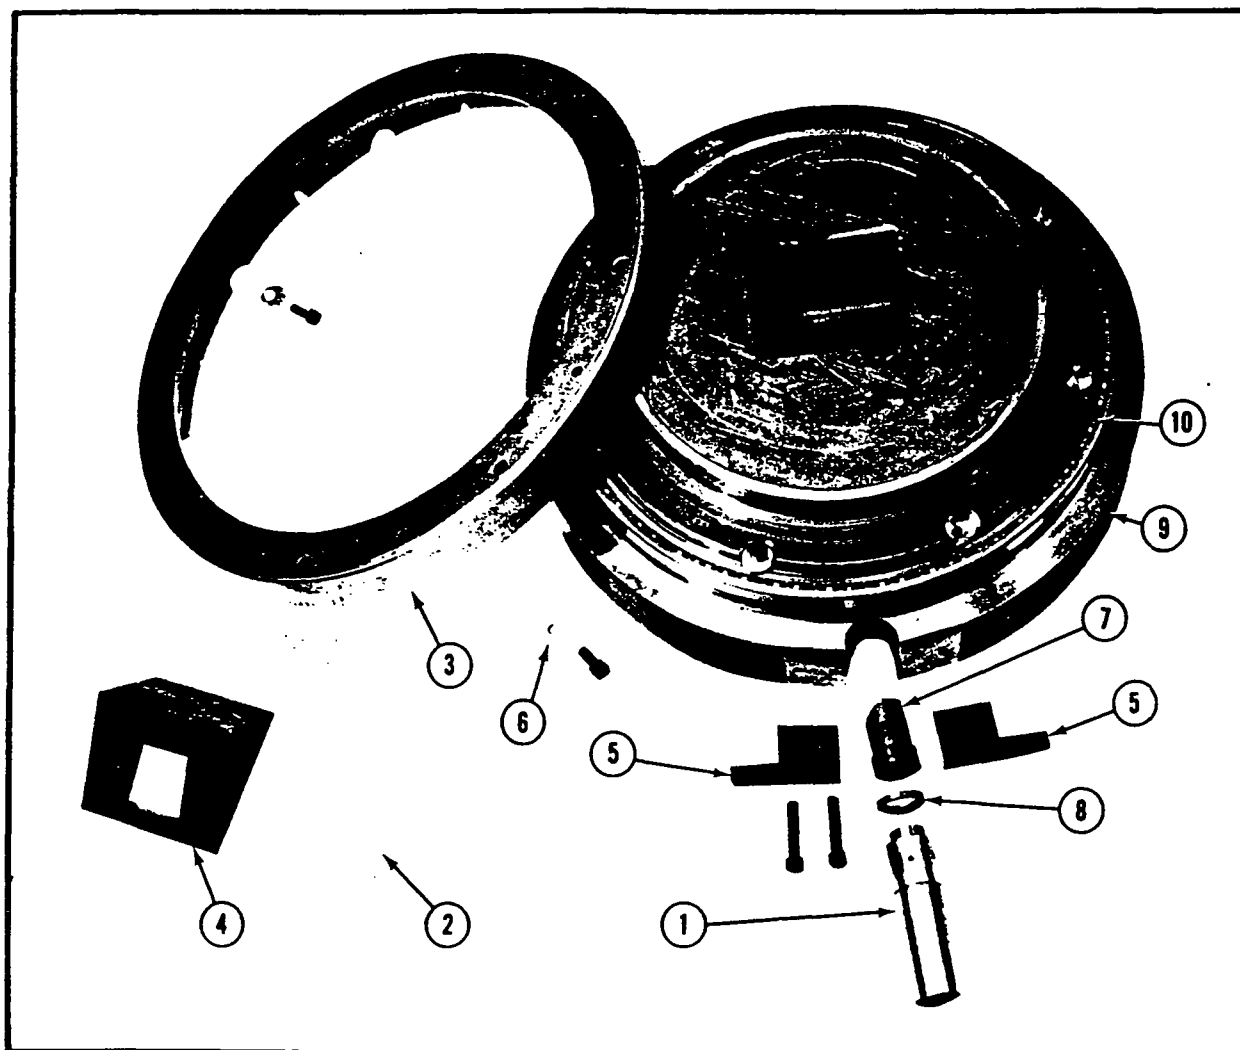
COBALT COLLIMATOR BEARING RING ASSEMBLY
